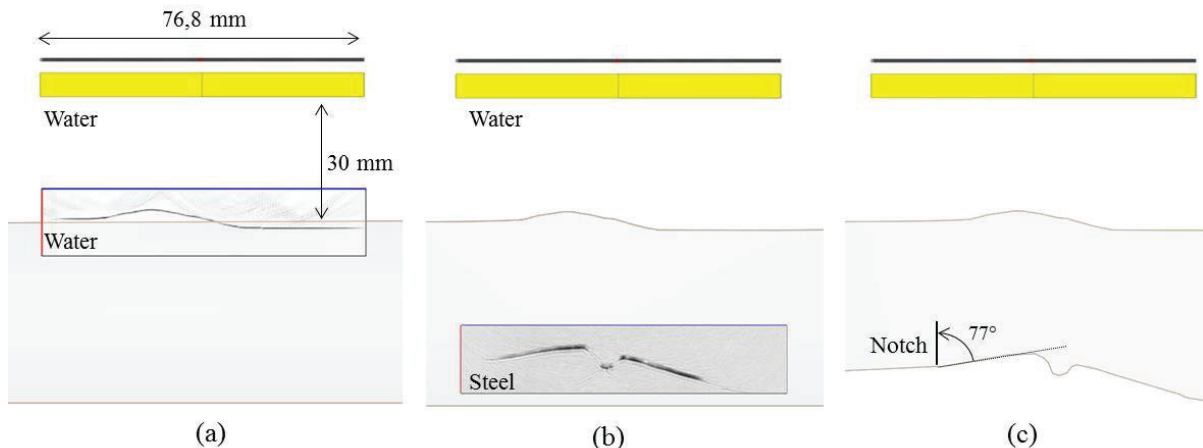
Principle of the full adaptive TFM applied to a specimen with a butt weld geometry: surface imaging (a) extraction of the surface geometry and back-wall imaging (b), complete 2D geometry of the butt weld (c).
